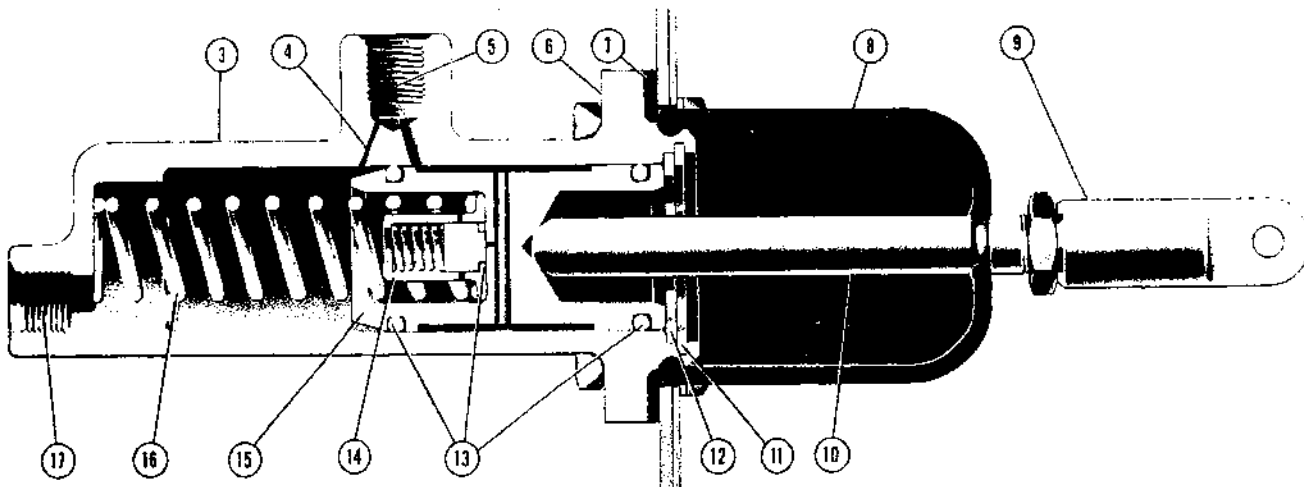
Brake Master Cylinder, Serial Nos. AF44-84992 through 44-85336
